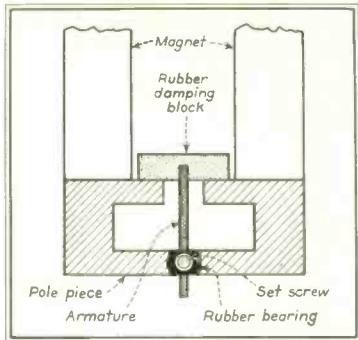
AN OLDER TYPE CUTTING HEAD.
